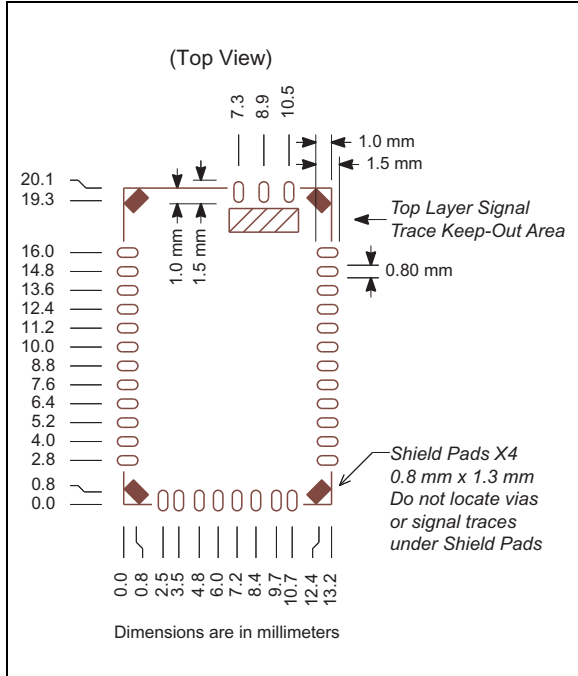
RN-41N MODULE MOUNTING DETAILS
